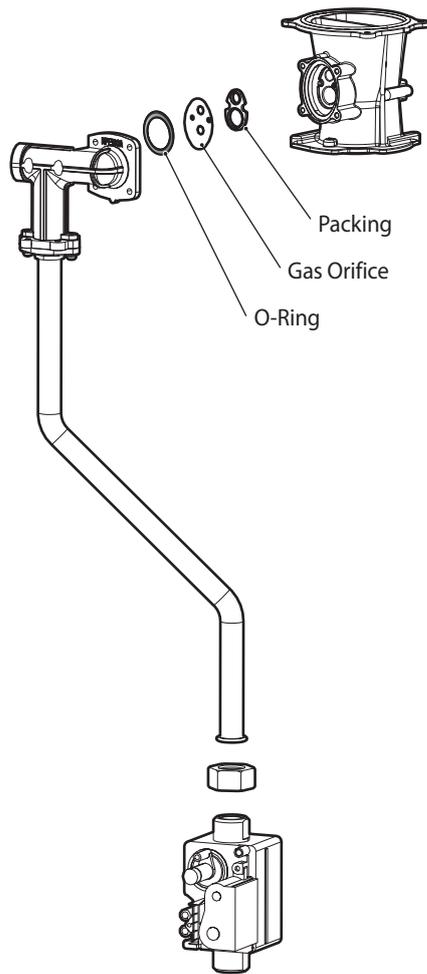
Exploded View of Gas Pipe Assembly (NCB-40LDWE, NCB-33LHWE)
